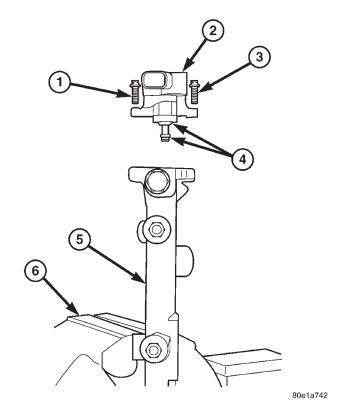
FUEL PRESSURE SOLENOID ASSEMBLY
